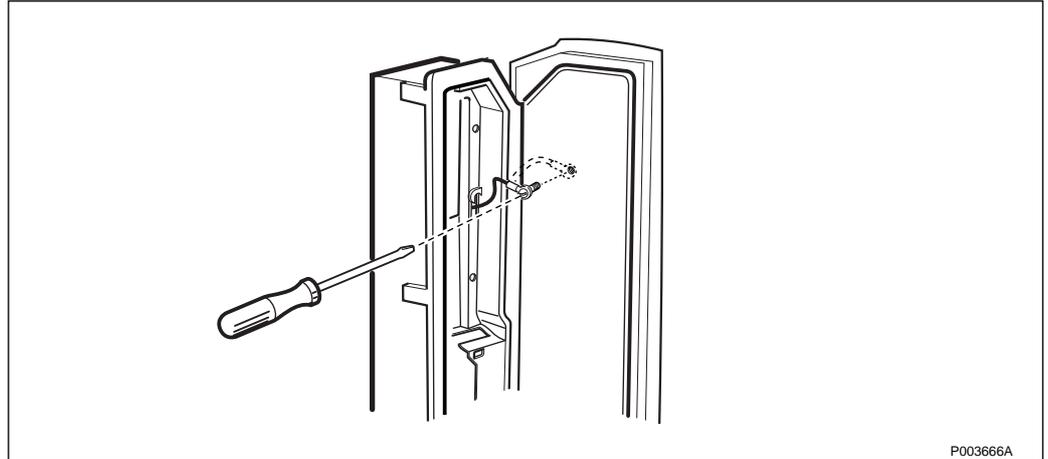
Mounting the earth cable, Installation Box Door without HDSL
